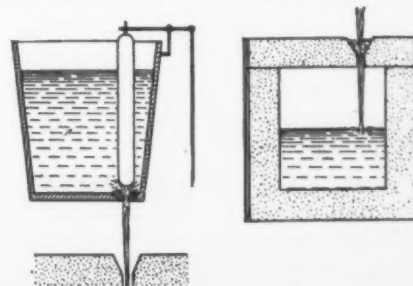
(Left) An example of filling using bottom-pouring ladle. (Right) Direct running into mold cavity.
